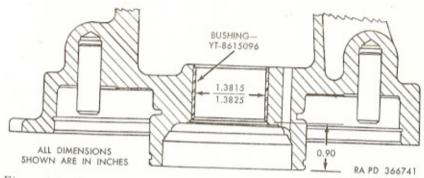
Sectional view of output shaft bearing retainer and bushing.
